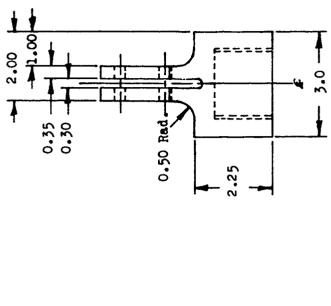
CONFIGURATION A - THREE INCHES WIDE BORON/ALUMINUM BASELINE SPECIMEN
